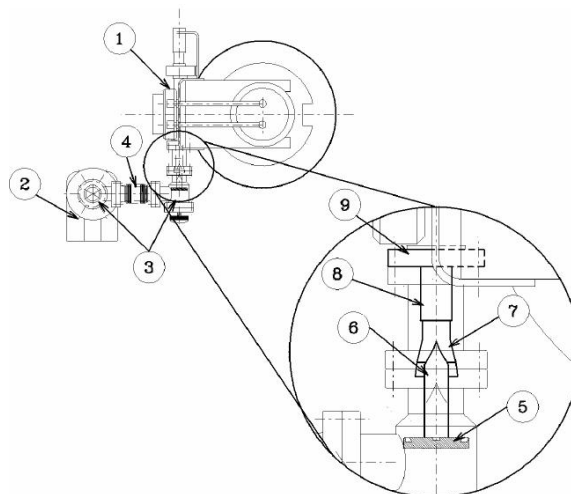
top view of the klystron and the auxiliary pumping system. The inlet shows a detail of the apparatus used to break the vacuum of the tube. 1 – TH2075 Klystron; 2 – Ion pump (30 l/s); 3 – Right-angle valves; 4 – Bellows; 5 – Bonnet; 6 – Stainless steel spike; 7 – Pinch off port; 8 – Support tube; 9 – Special CF40 flange.
